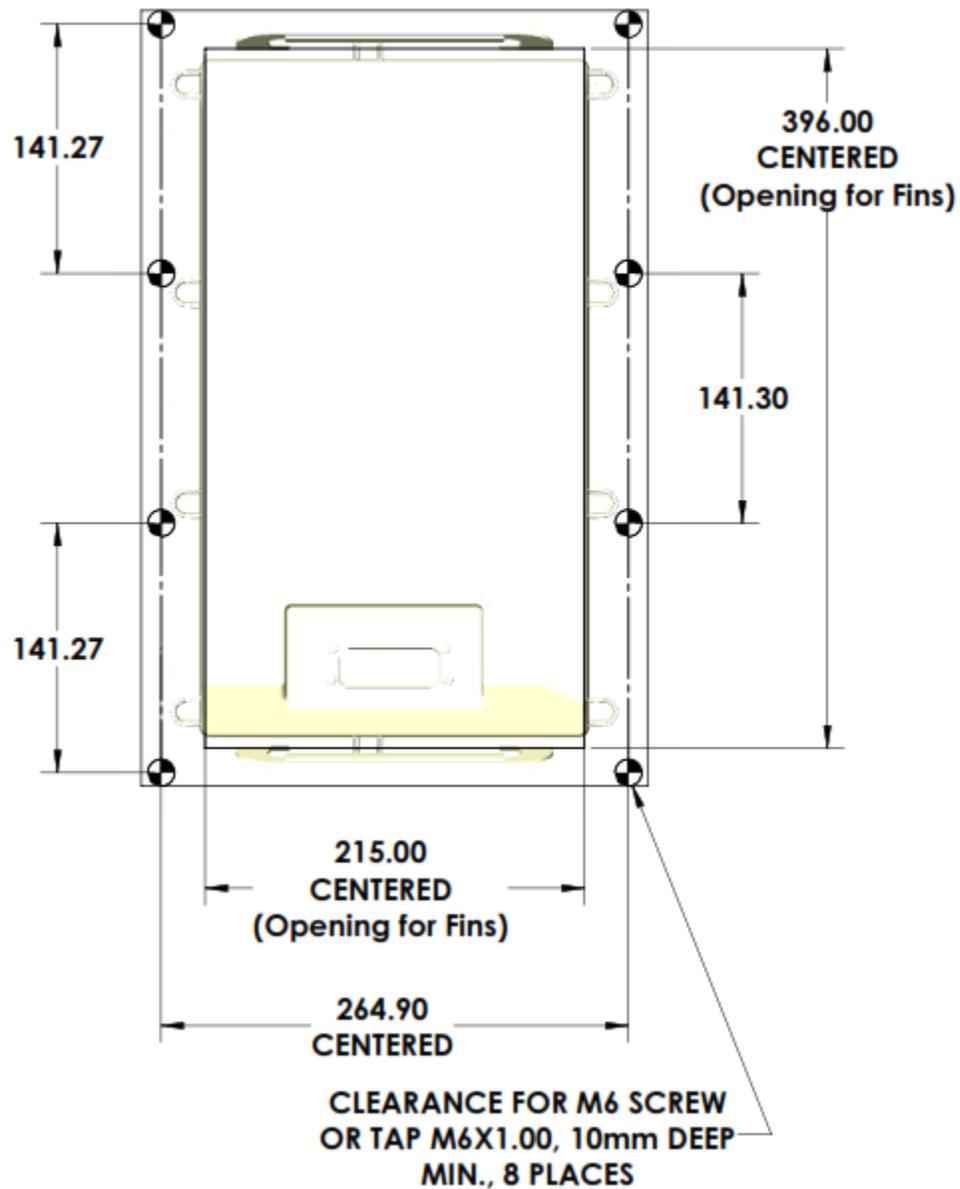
Mechanical Mounting Diagram, Models OZip-RE
